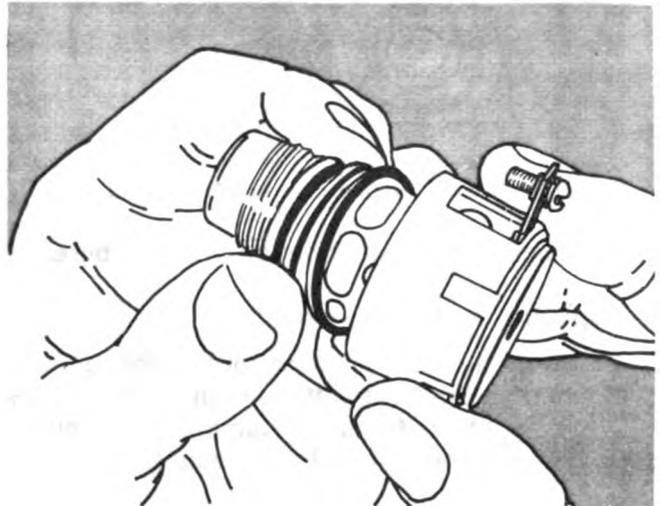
Install The O-Ring Seals Onto The Solenoid Valve.
